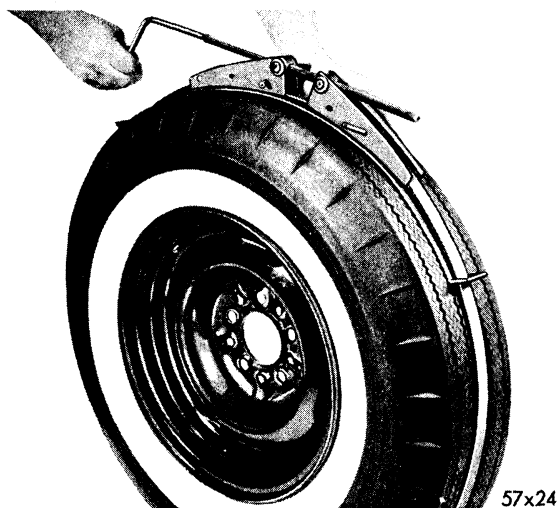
Constricting Centerline of Tire with Mechanical Tool
